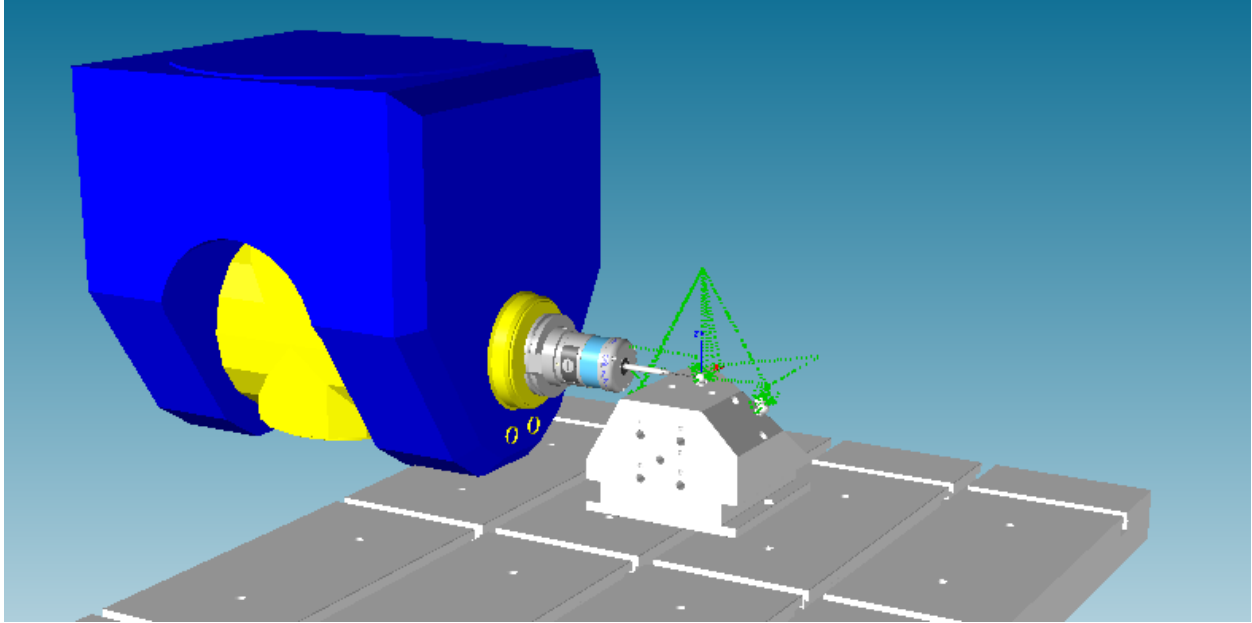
AN90C0 Machine Spindle Measurement Orientation.
